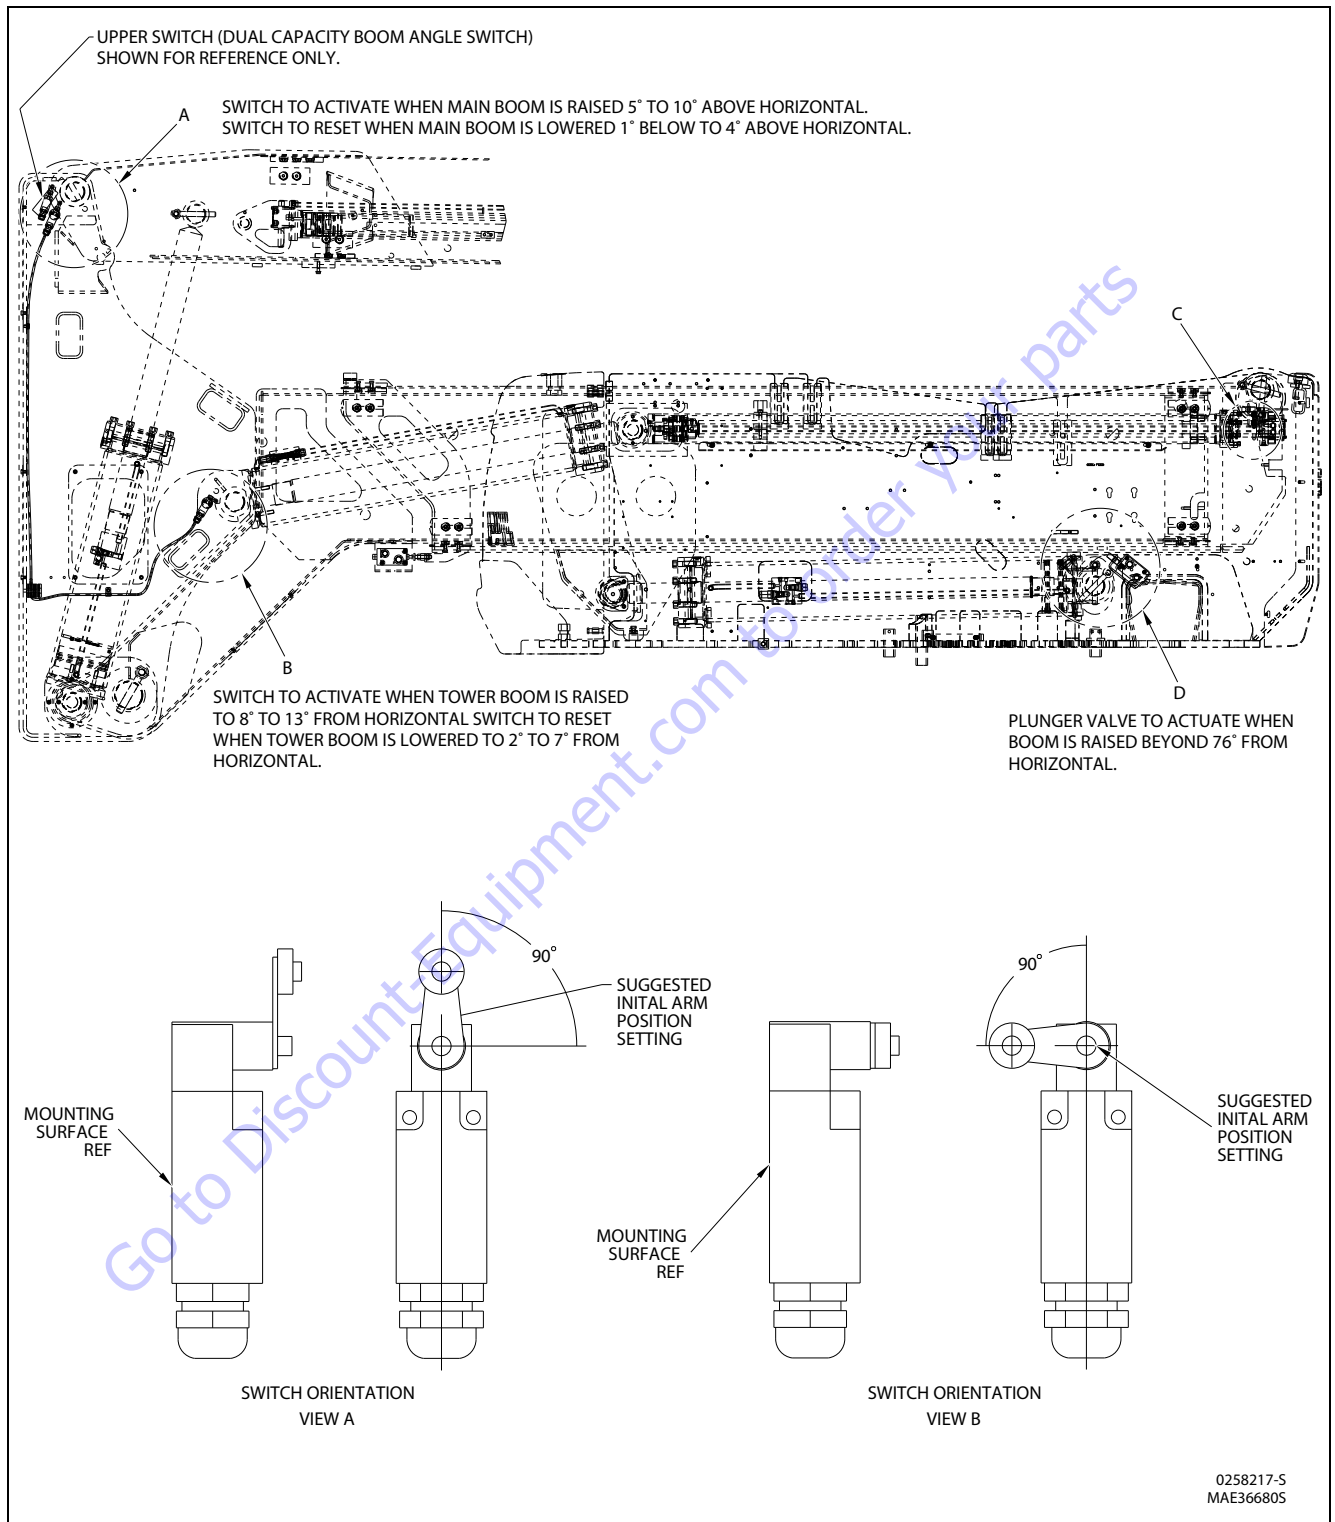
Boom Valve and Limit Switches Location (Sheet 1 of 2)
